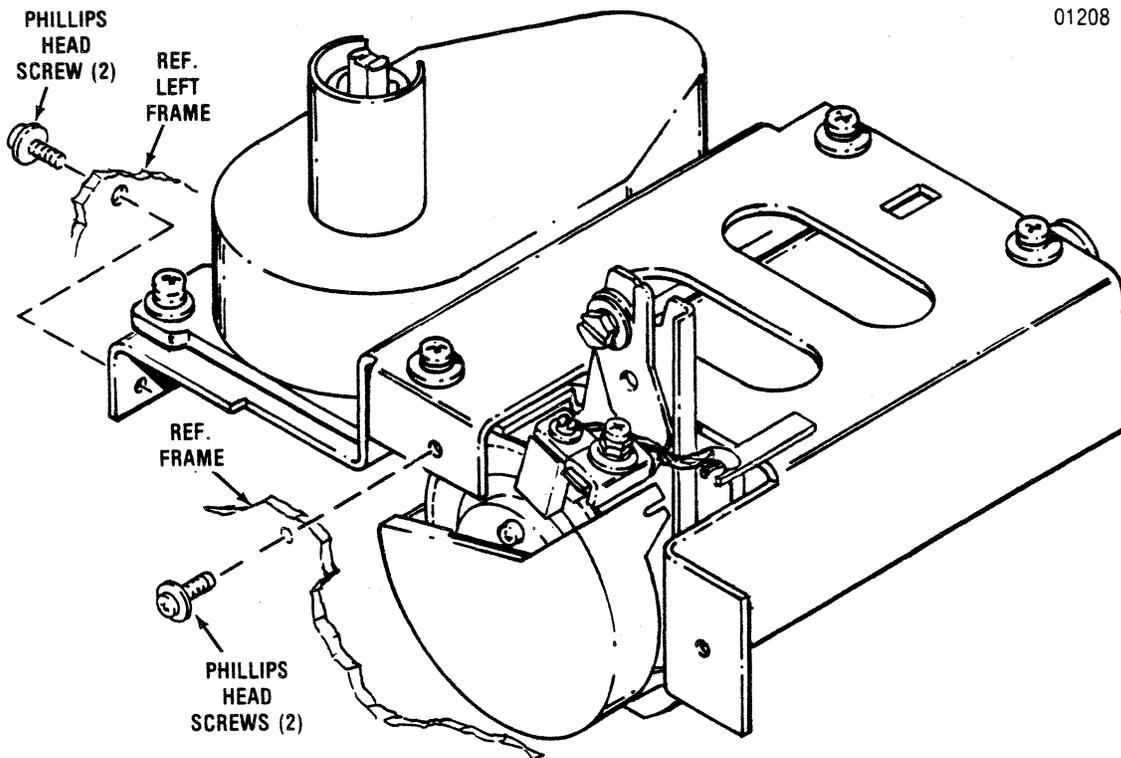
Removal/Replacement, Ribbon Drive Motor Mounting Bracket
